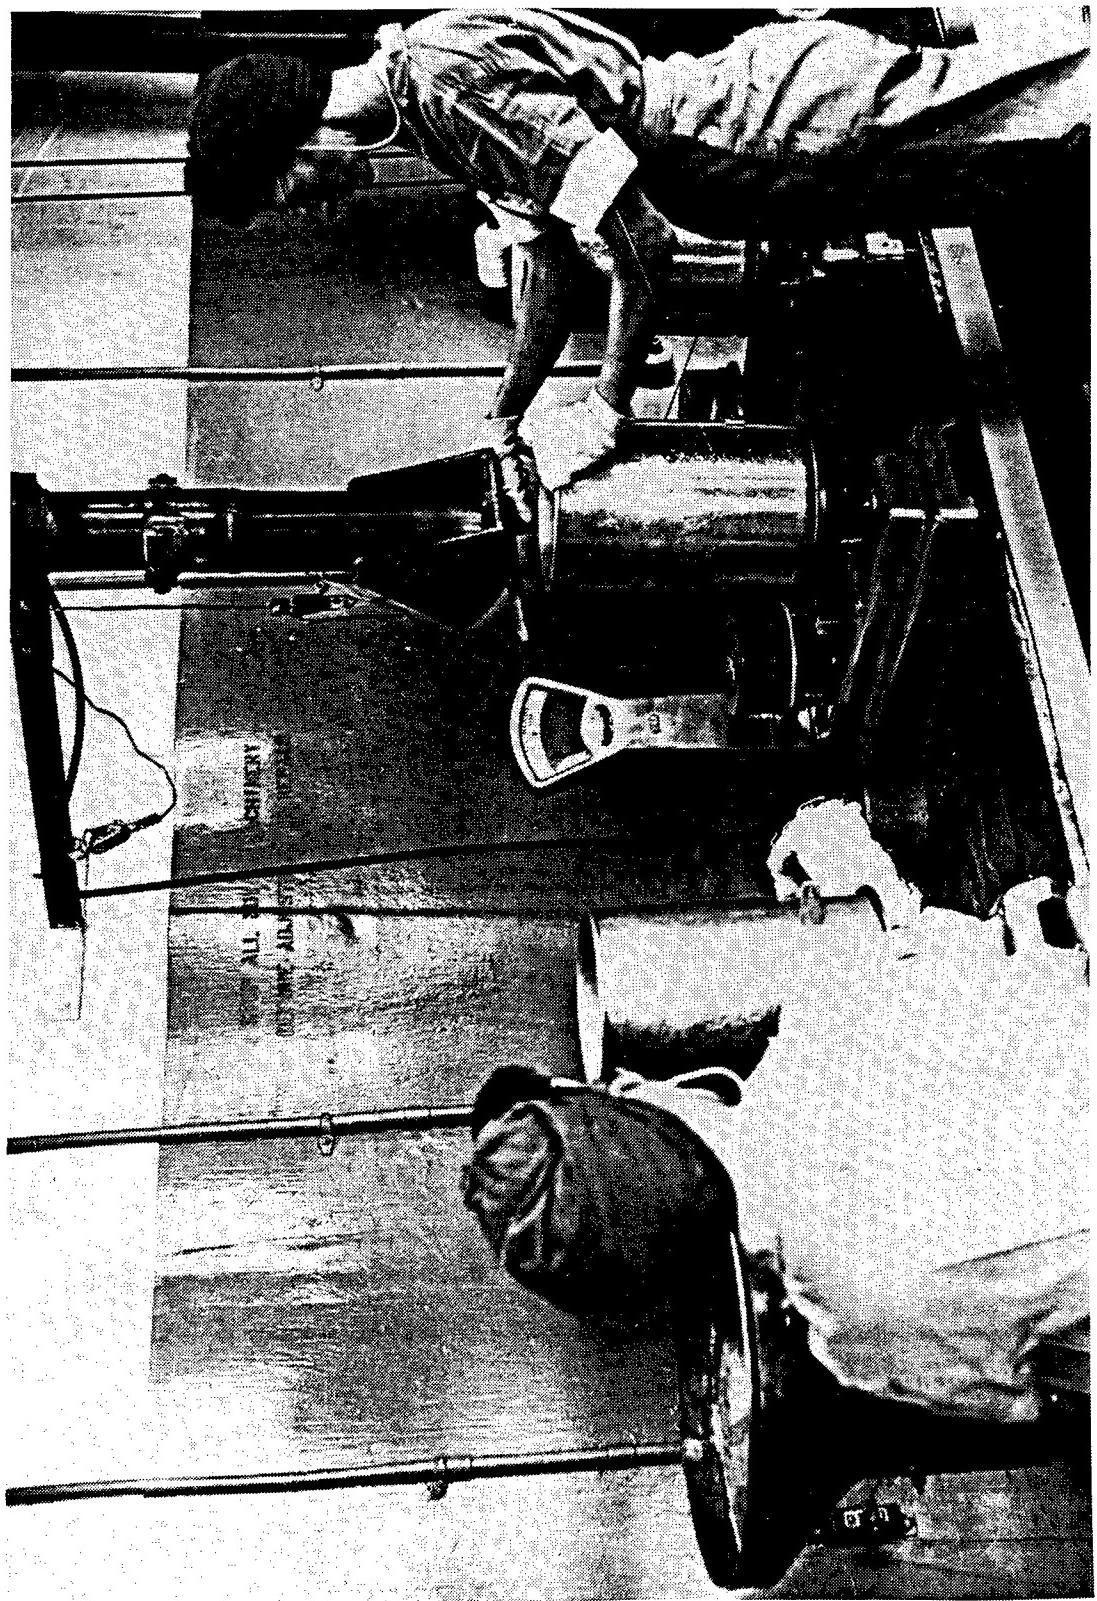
Operators weighing powder, placing the powder into increment bags, then sewing the bags shut in a loading booth, LAP Building, Hoosier Ordnance Plant
